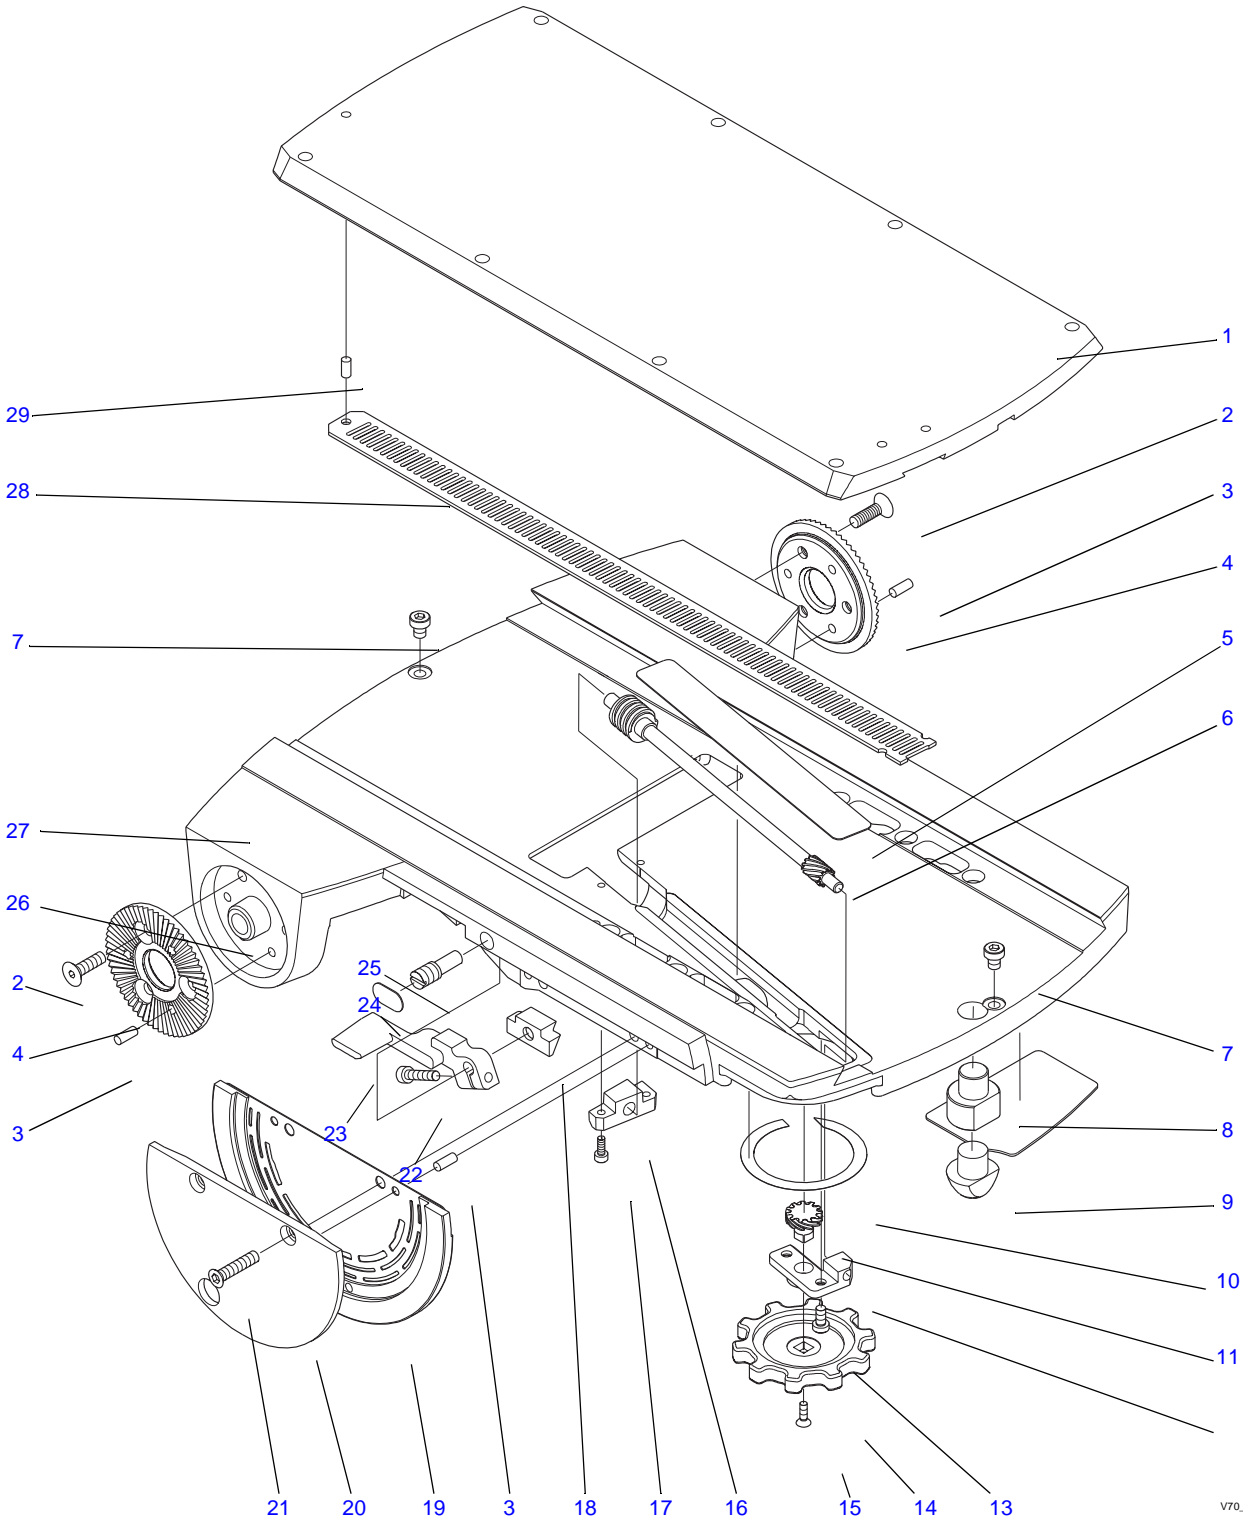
Vector 70/70H Pan and Tilt Head - Tilt Brake/Balance Knob/Centre Lock
